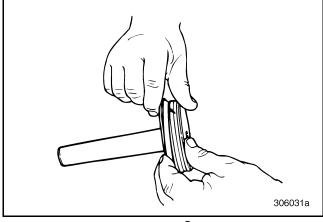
Removing Teflon<sup>®</sup> Seal and O-Ring from Piston Grooves
